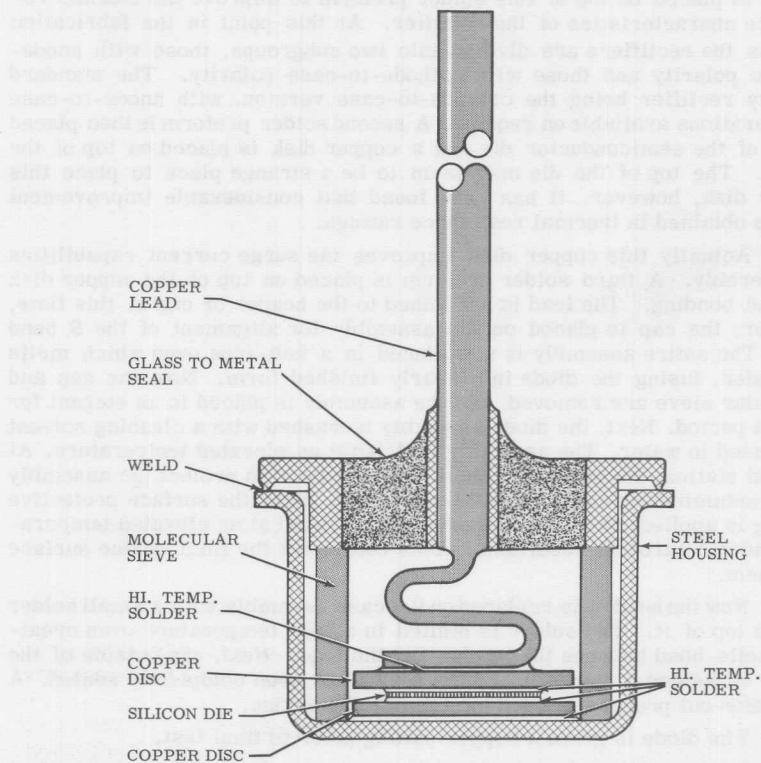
Cut-Away View of Basic Rectifier Cell Illustrating Mechanical Assembly Details
